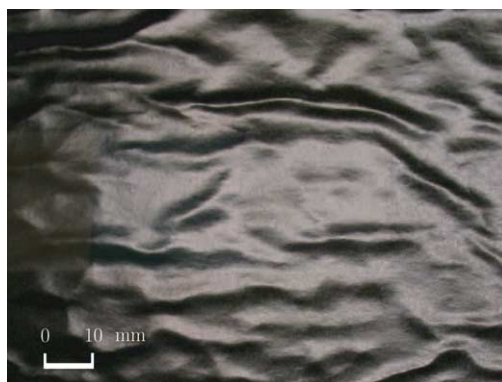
A surface of a delaminated paperboard with wavelike appearance on the printed surface.
